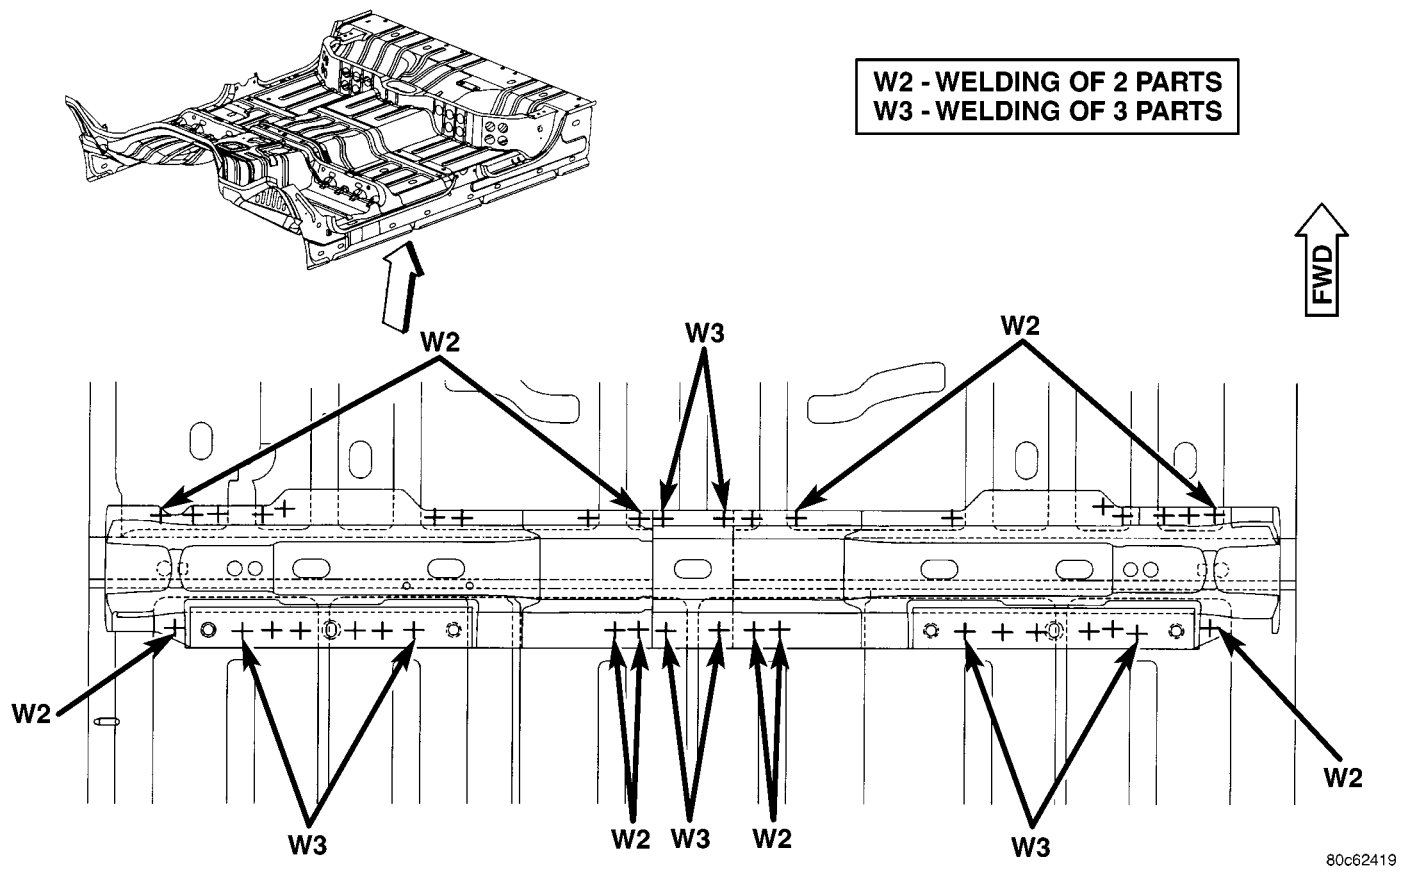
RIGHT REAR FRONT SEAT MOUNTING CROSSMEMBER - QUAD CAB
